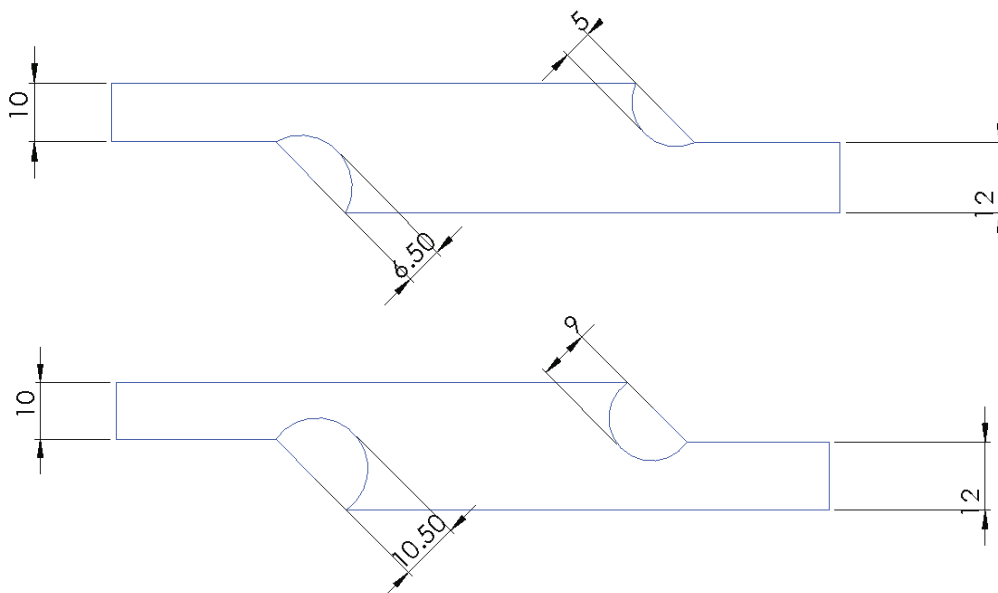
Geometry of the two numerical models with different welded joint dimensions.
